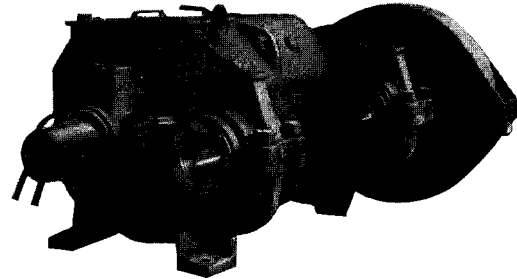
Type MC Motor With Countershaft Brackets and With Gear Case in Place
